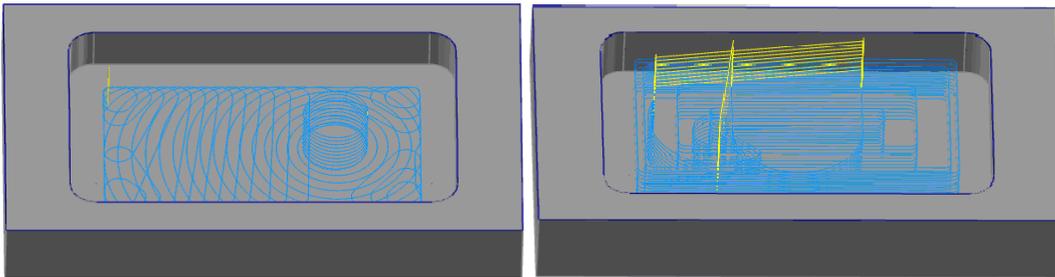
The tool path of rough finish for the dynamic milling and traditional milling
